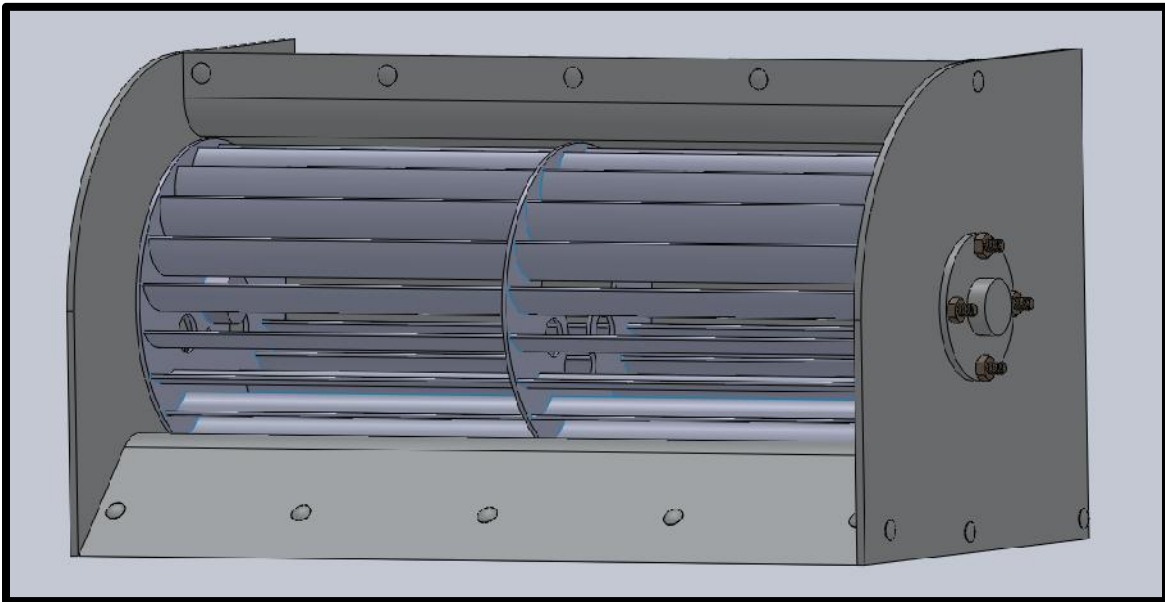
SolidWorks 20-bladed cross-flow fan assembly.
